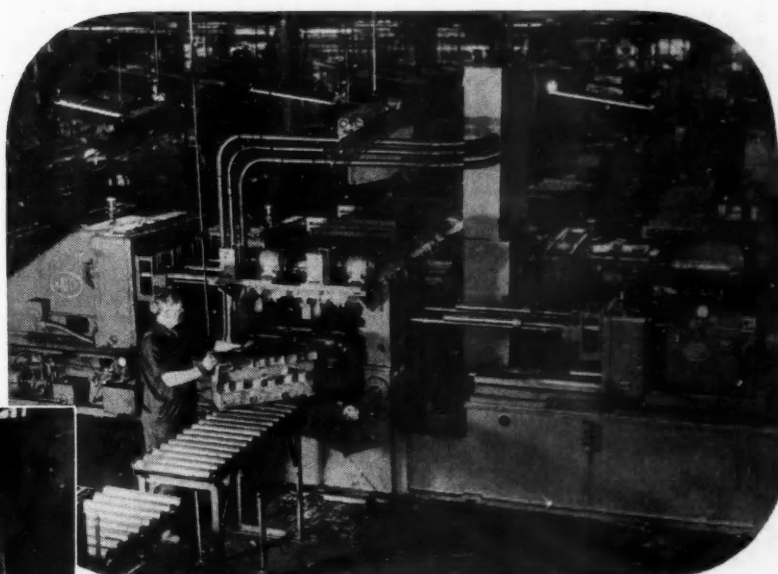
Huge tunnel type Natco boring machine used to rough and finish all cam and crank holes. It performs five sets of operations on each of two blocks, completing two blocks in each cycle.
